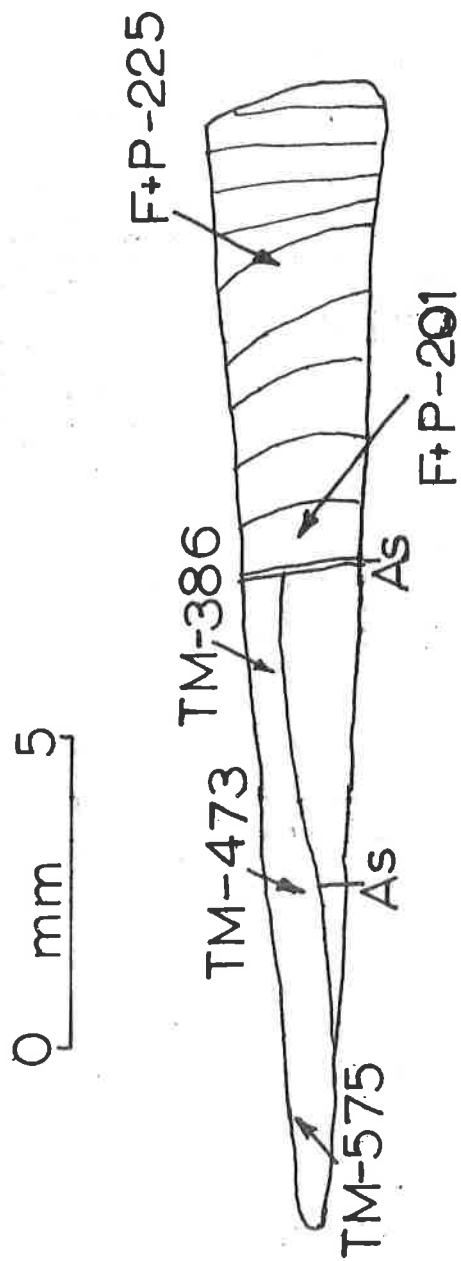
Section through a pattern-welded knife blade from 13-14th. cent. Winchester (BS1031).
